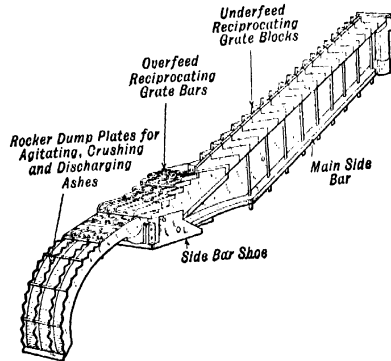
Reciprocating Grate Bar — Riley Stoker.
